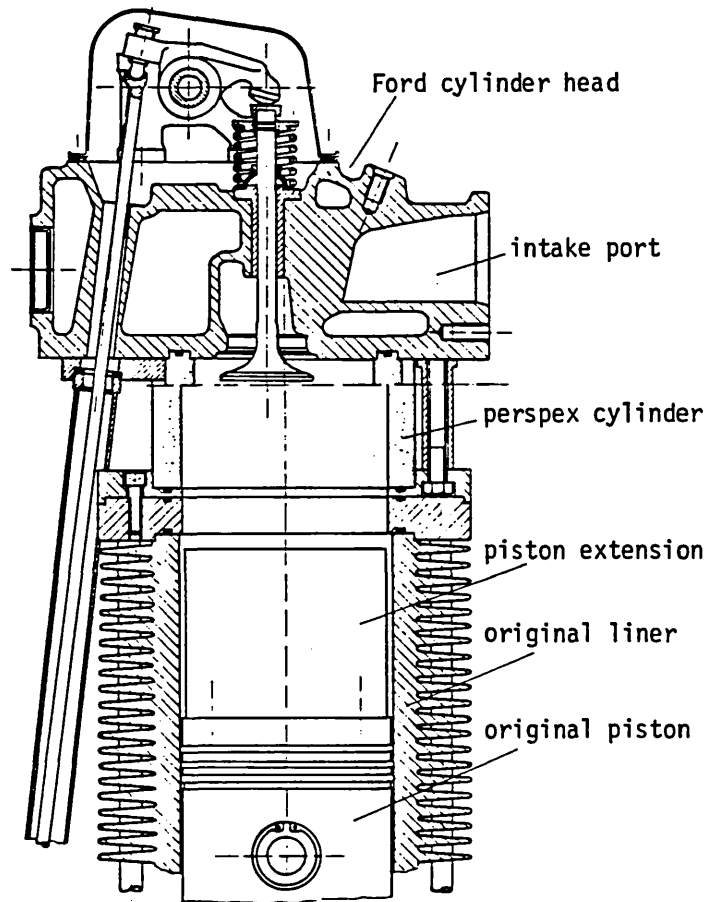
Diagram of the modified Diesel engine with the Ford 2.5 L cylinder head; optical access to the cylinder
